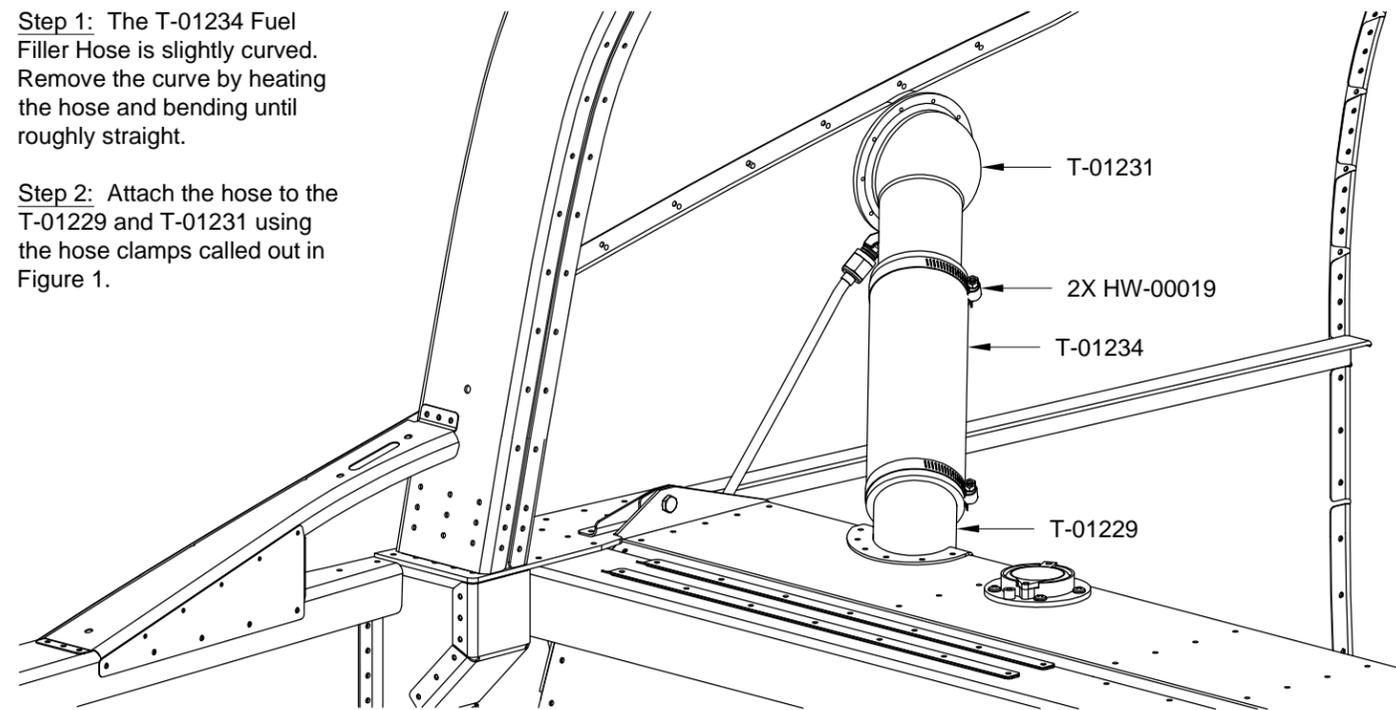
ATTACHING THE FUEL FILLER HOSE
